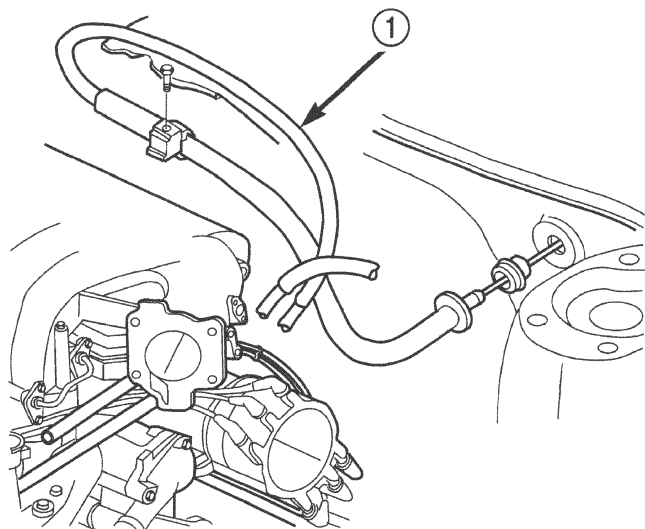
Throttle Cable Attachment to Throttle Body
